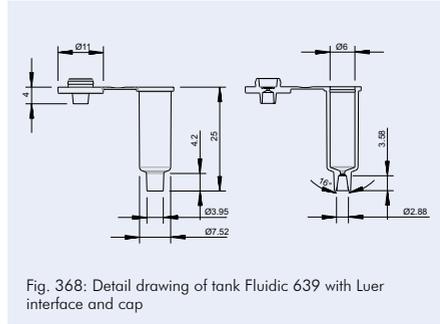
Detail drawing of tank Fluidic 639 with Luer interface and cap
